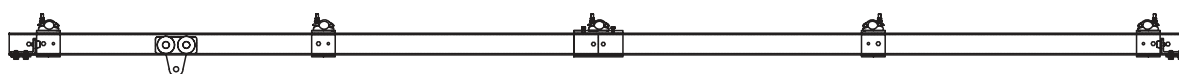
System with multiple track sections connected with a joint support.
